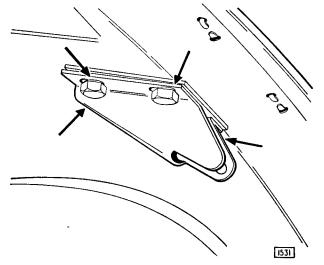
Showing the screws for adjustment of the boot lid striker.
